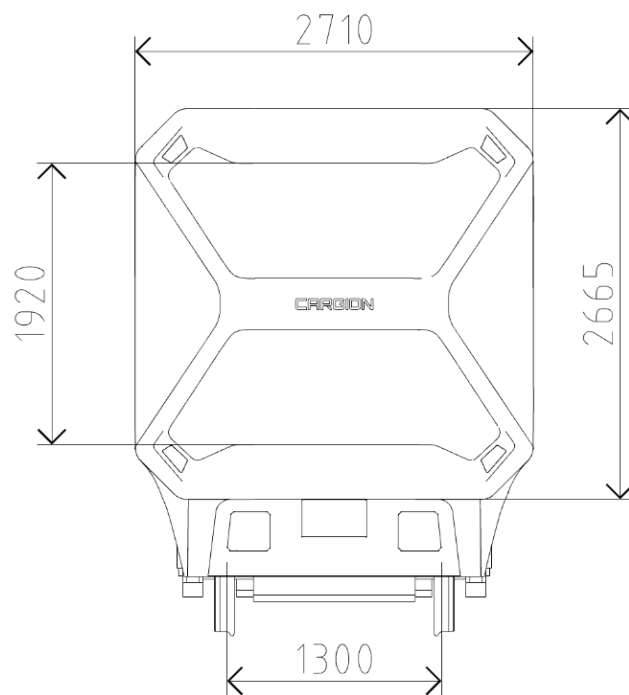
Main dimensions of the unit, front view (in millimetres)
